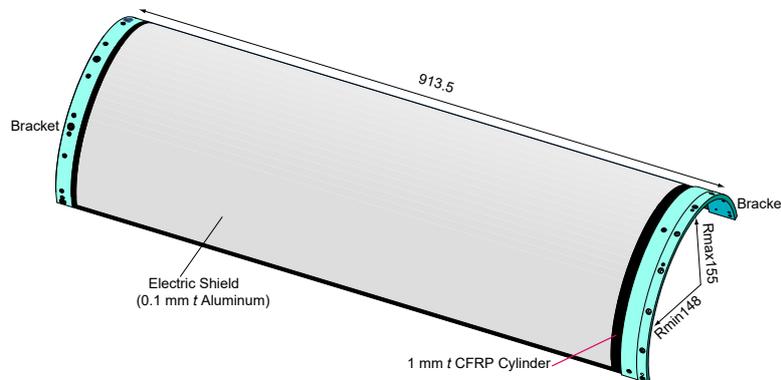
The structure of the VXD outer cover. All dimensions are in mm.
